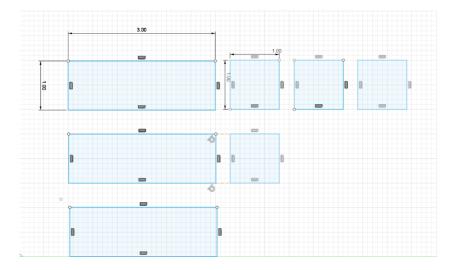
Dimensions of the plywood cutouts (in meters) for the housing
